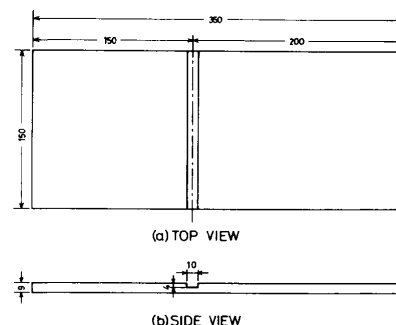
Dimensions of the specimen for addition of manganese and sulphur using submerged-arc welding
